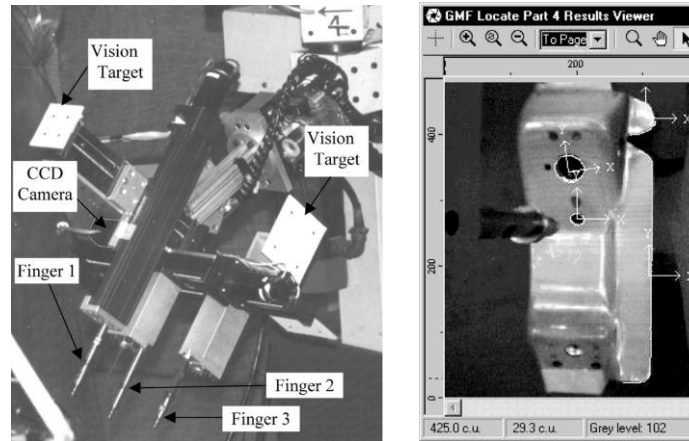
A fixtureless robotic assembly cell. From left to right: a. The robot end-effector with CCD camera; b. Detected features (Bone *et.al.*, 2003)
